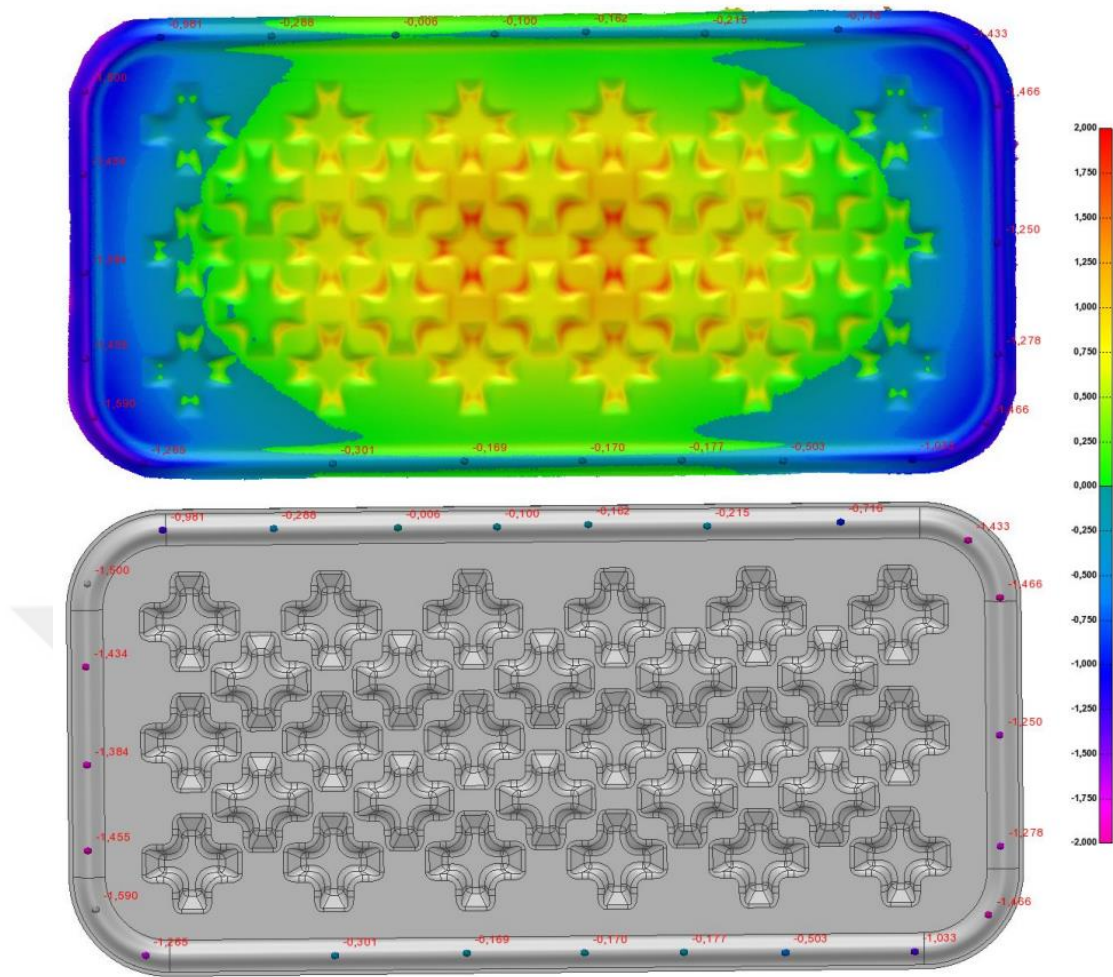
FARO laser scanner result of deformed sheet to investigate springback
